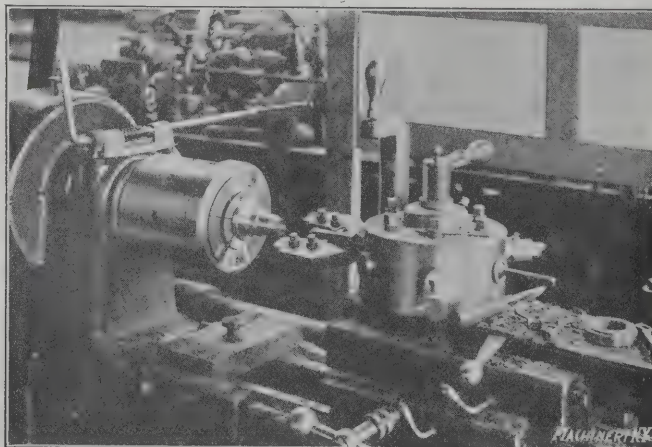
Injector Nozzle being turned while held in Pneumatic Chuck
